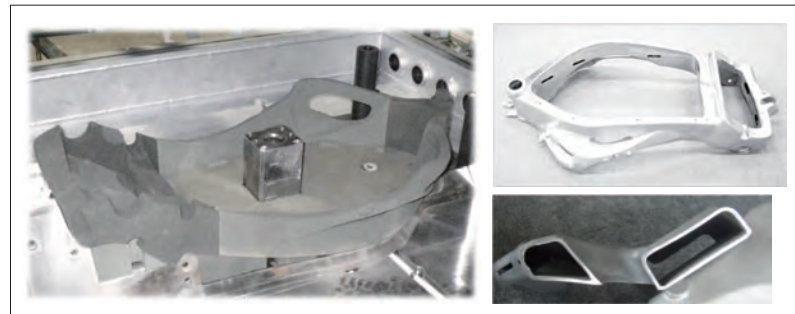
Trial production of a motorcycle frame using a 3D printer lamination-formed mold
